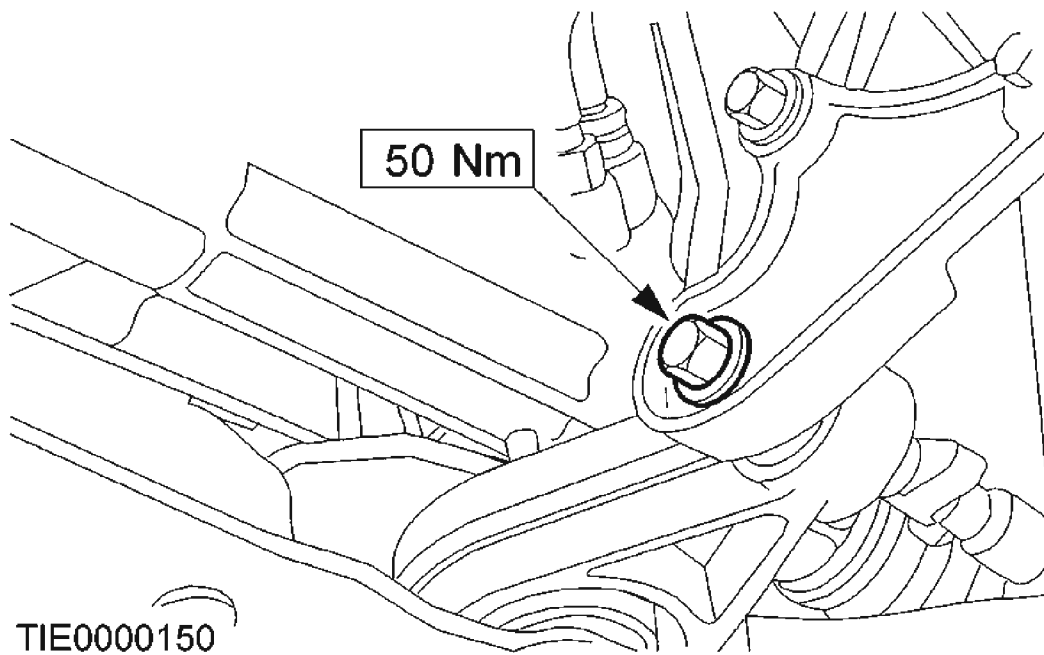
Installing Engine Support Insulator To Transaxle Center Bolt
